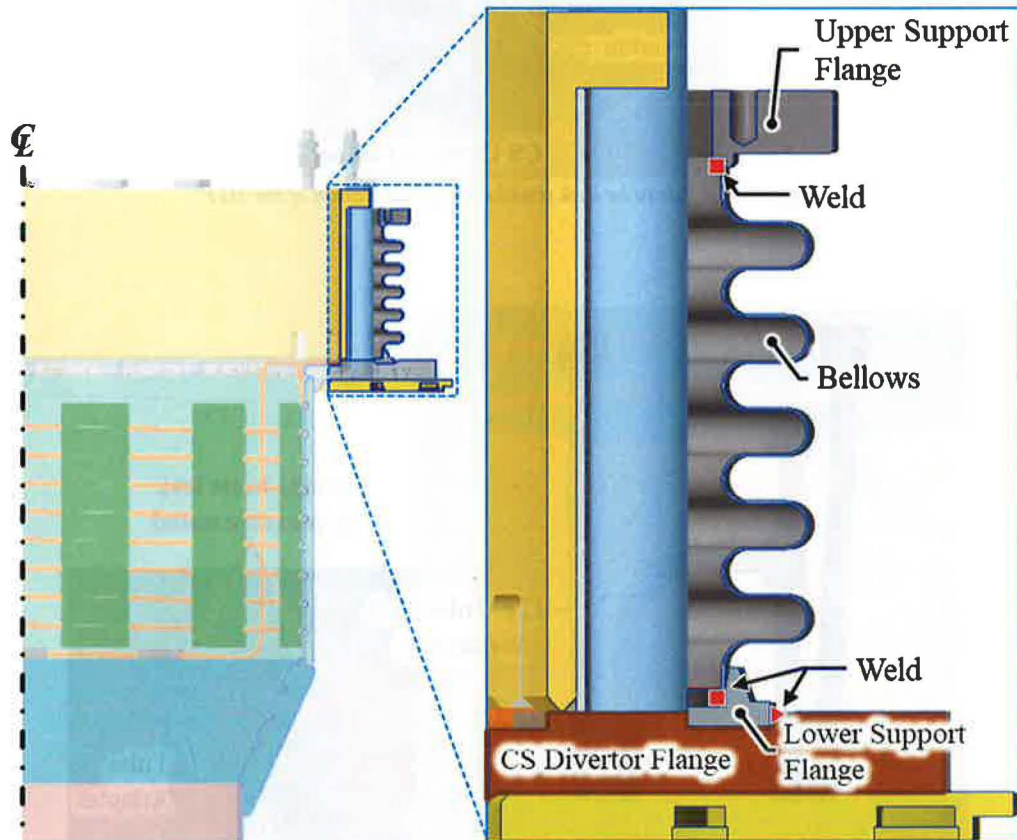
Welds to be tested as part of the Bellows and Bellows Flange Weldment
